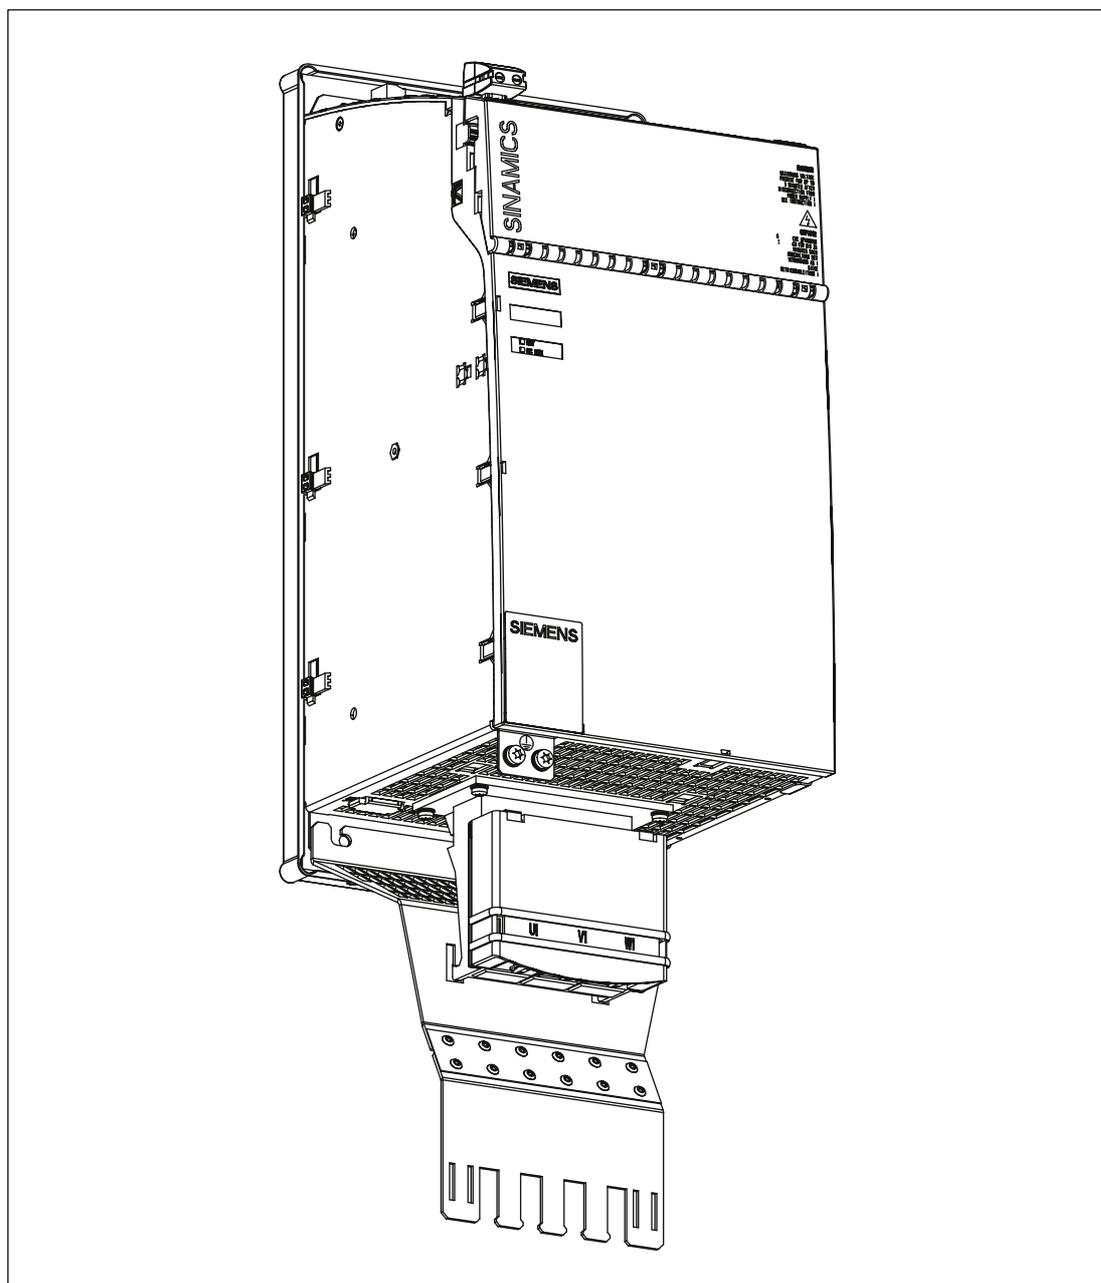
Shield connecting plate for a 200 mm module with with a cold plate
